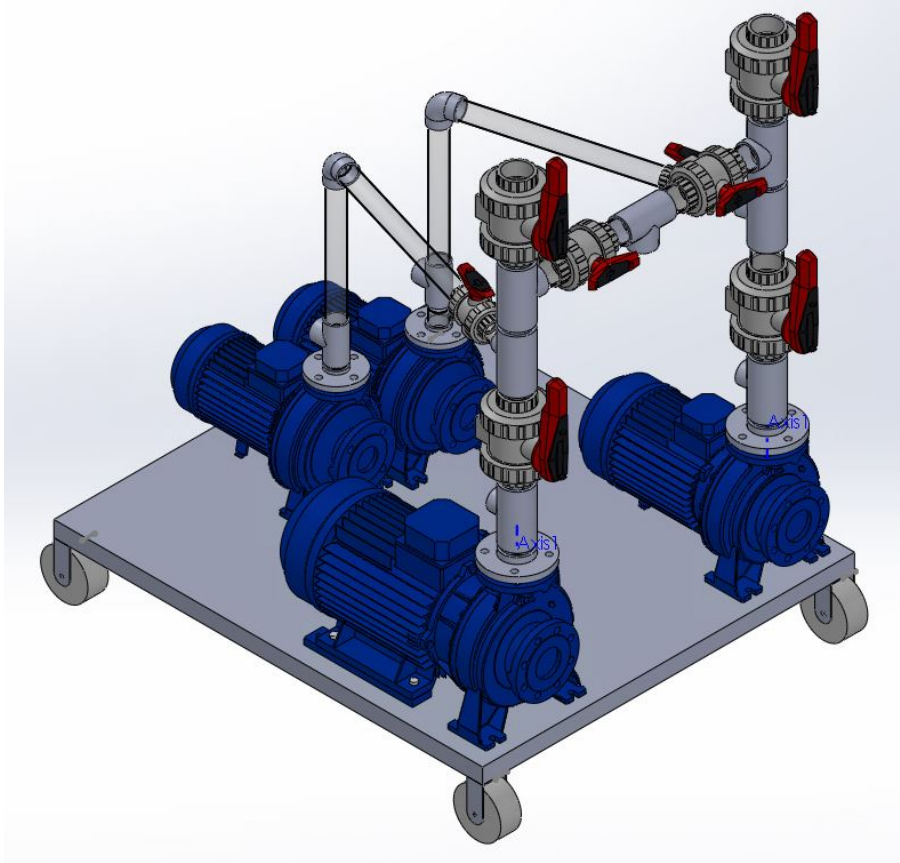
Manifold for pumps (Drawing by Espen Hestdahl)
